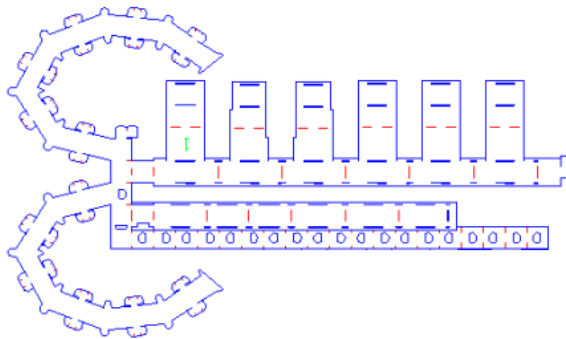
2D unfolded technical drawing of a C-shaped leg design.
